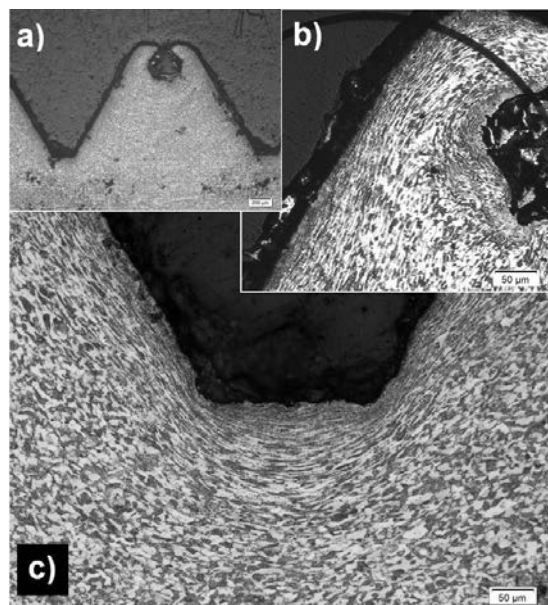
Metallographic photo of thread cross-section M16: (a, b), view of the top of non-fulfilment of the thread outline, and (c) the bottom of the furrow
